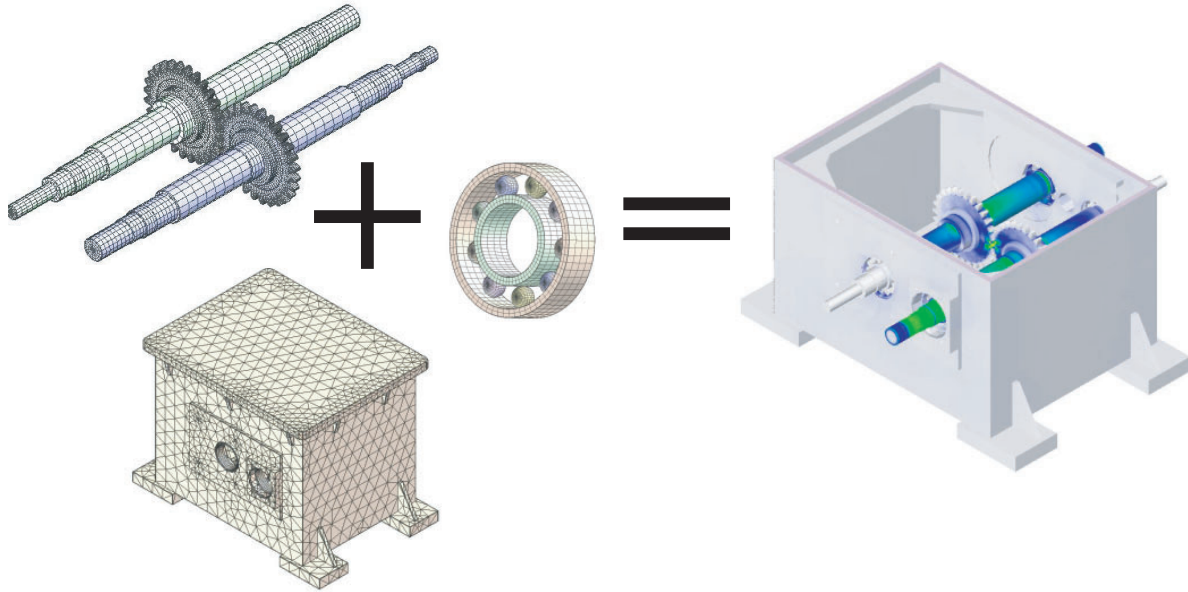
Assembly of the gear-bearing-shaft-housing model.
